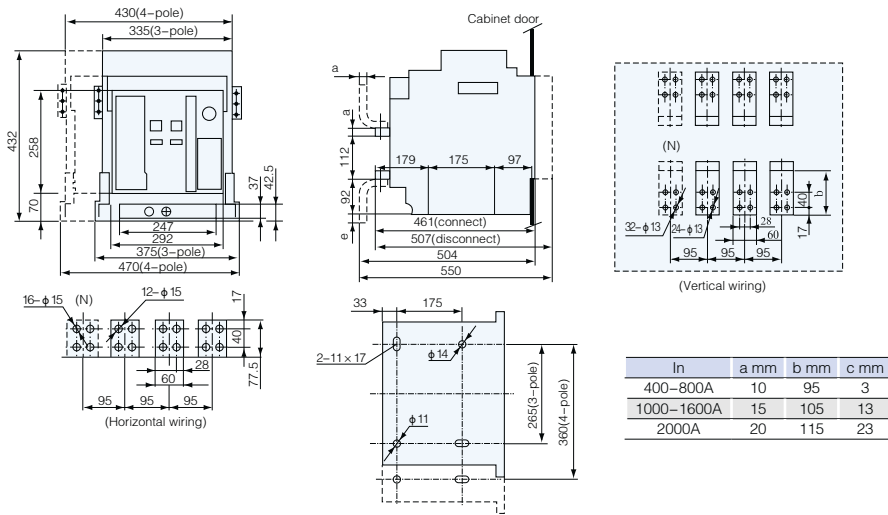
overall and mounting dimensions of drawer type breaker (OW18-2000, 2000/4)
